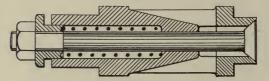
SUCTION VALVE MULTI-STAGE COMPRESSOR.
